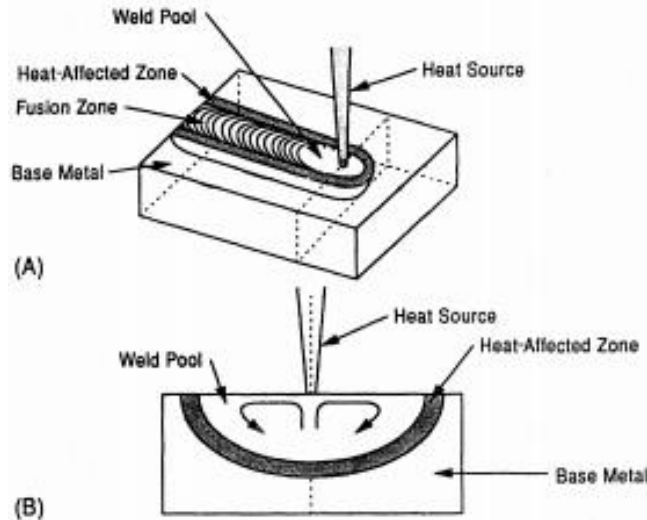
Schematic diagram of the fusion welding process:
